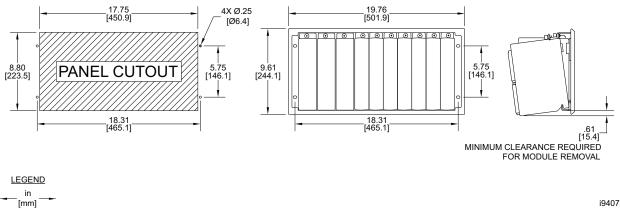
SEL-2240 Dimensions for 10-Slot Panel-Mount Chassis
